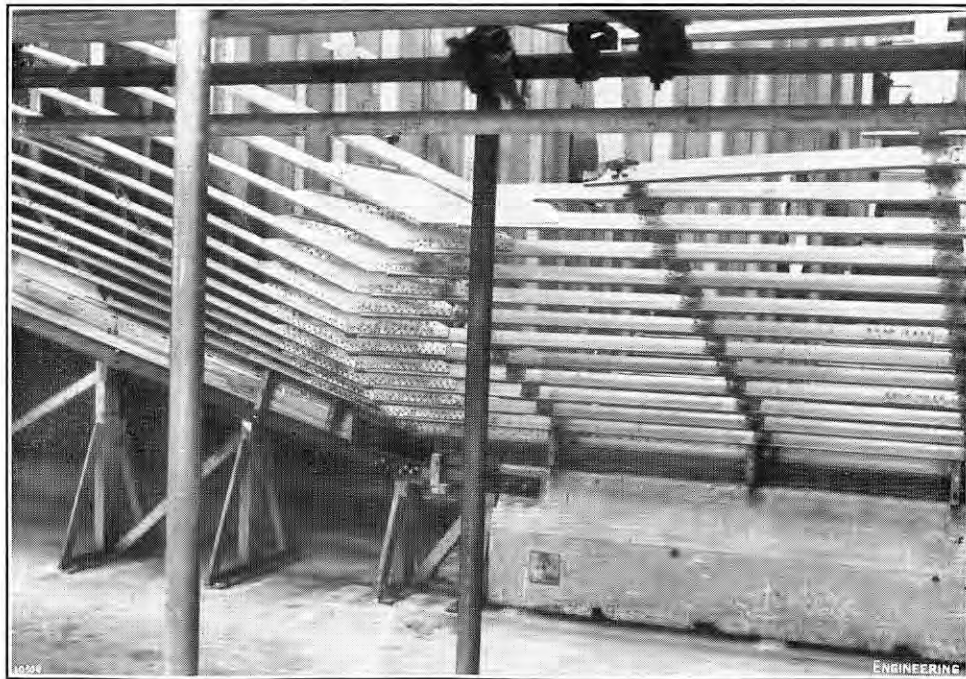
HULL STRINGERS, SHOWING DISCONTINUITY AT STEP.
